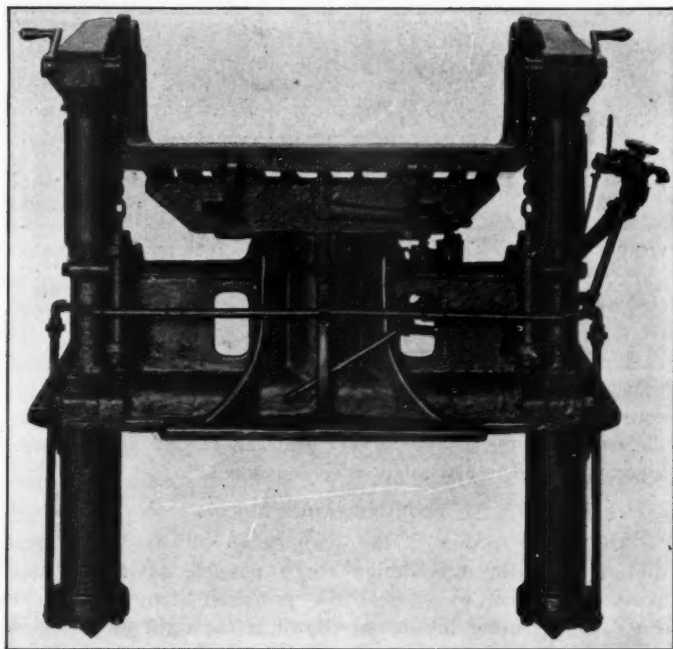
A MACHINE WITH PARTS CAST SEPARATELY ENTAILING UNNECESSARY MACHINING
